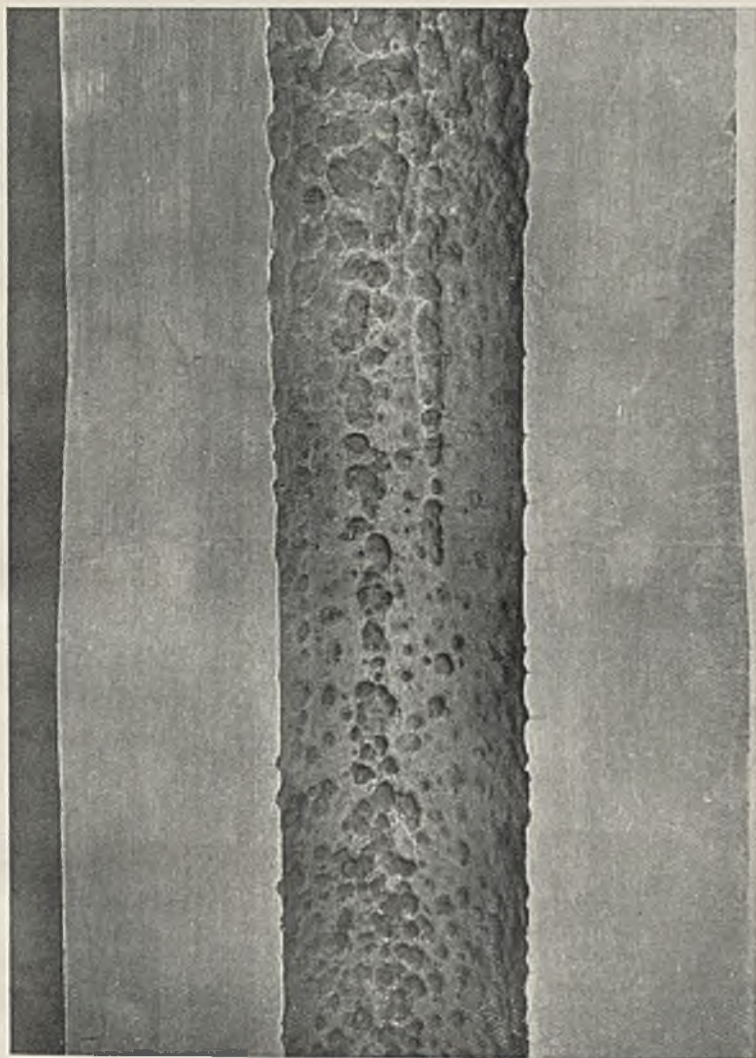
Water-Cooled Piston Rod of an Internal Combustion Engine. Failed in Service by Corrosion-Fatigue.
